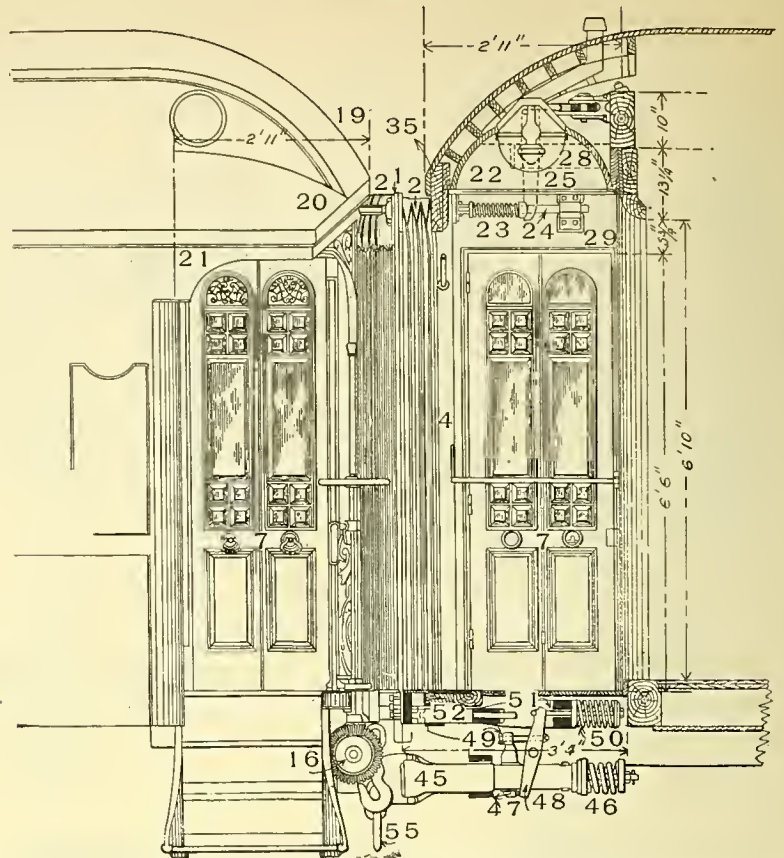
Side Elevation and Longitudinal Section, showing Equalizers and Springs for the Adjustment of Face-plates, and Hand-brake Gear.
